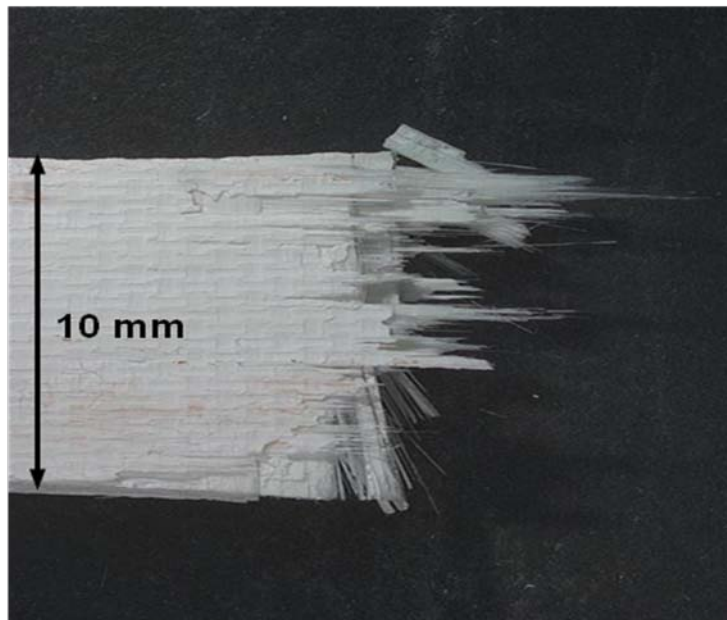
Fracture surface of the N720/AM specimen tested in tension to failure at 1100°C in laboratory air.
